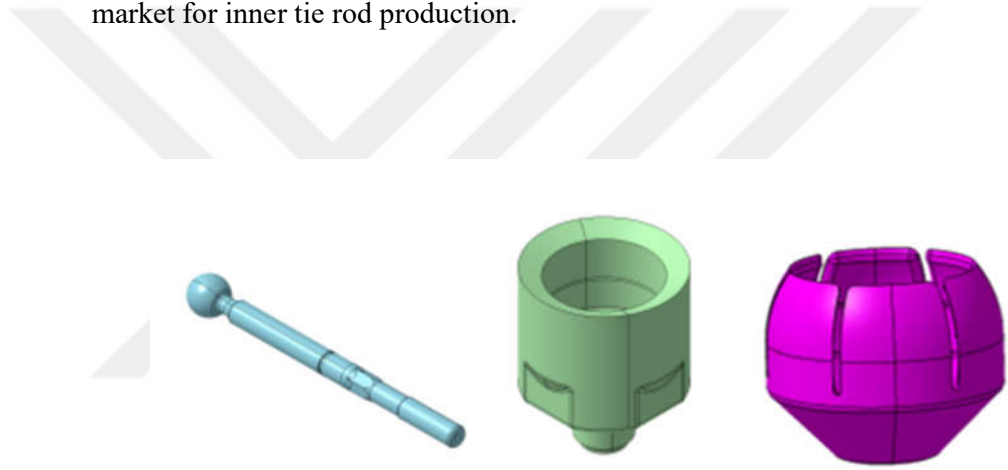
Part of the inner tie rod assembly, from left to right: ball stud, housing and ball race.
